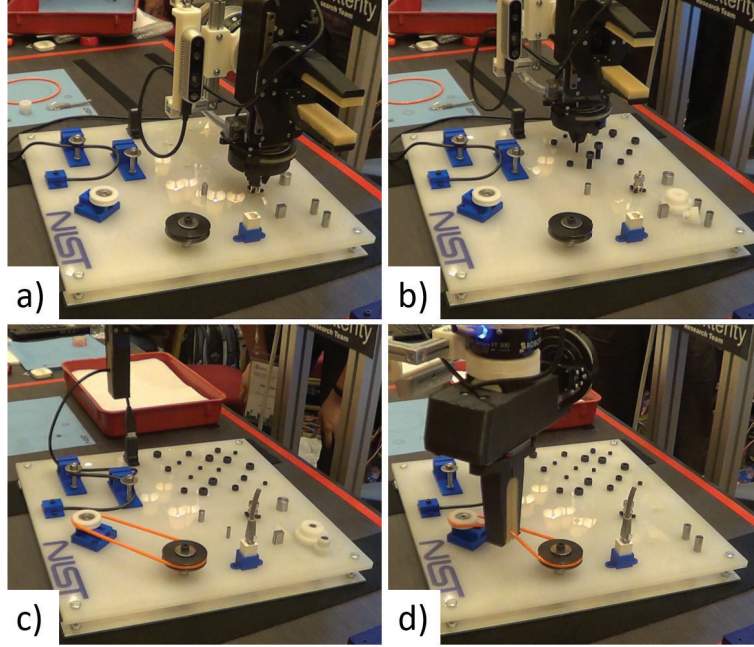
The developed flexible robotic assembly system competing in the IEEE/RSJ IROS 2019 Robotic Grasping and Manipulation Competition. The Subfigure illustrate the system executing: a) BNC connector assembly, b) fastener threading, c) cable disassembly, and d) belt disassembly.
